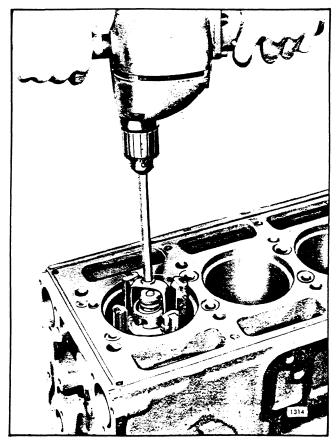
Honing Bore of Cylinder Block with Tool J 5902-01
